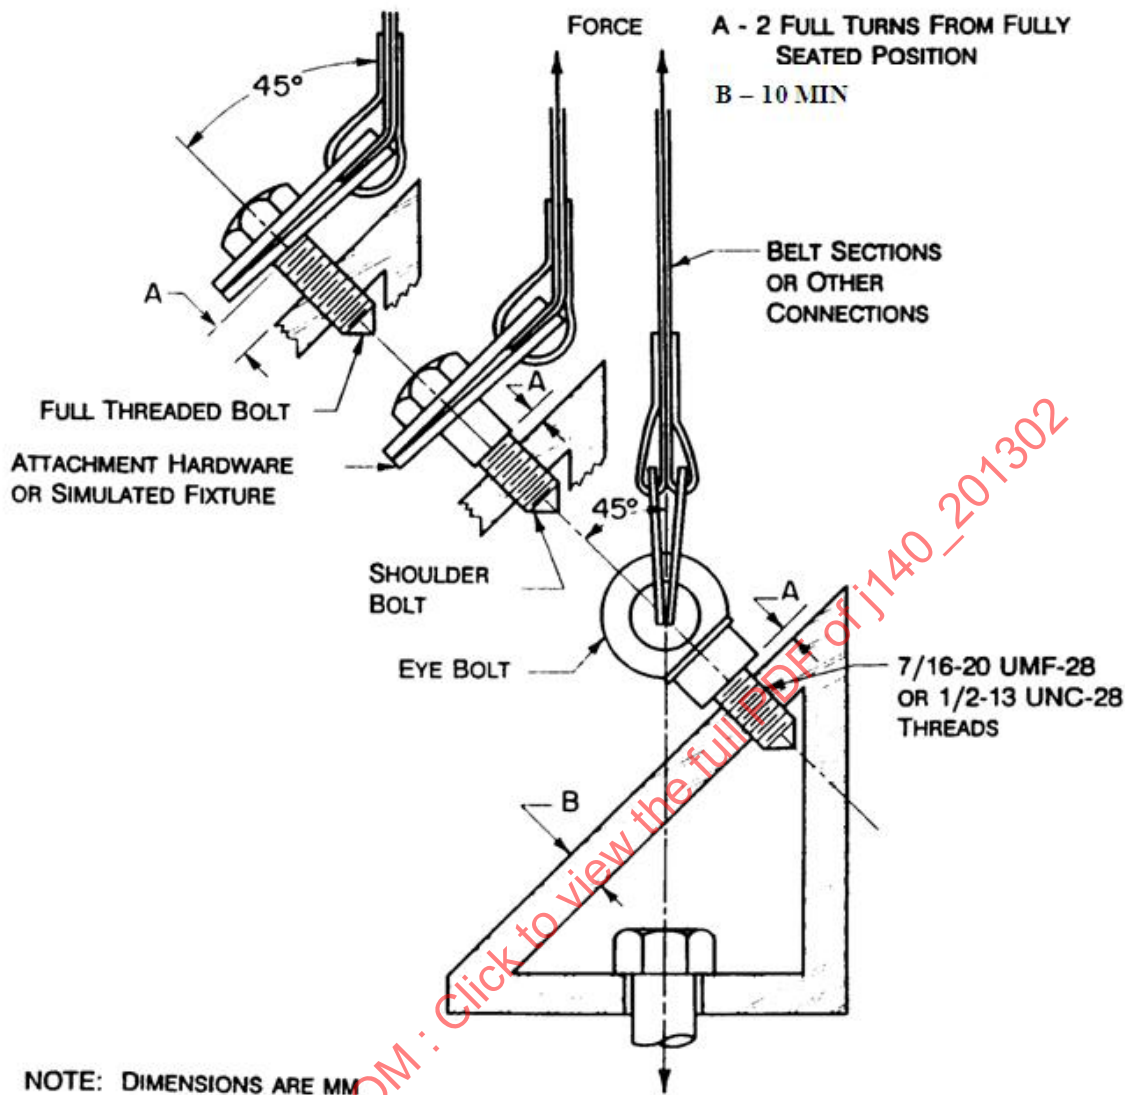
ATTACHMENT HARDWARE TEST FIXTURE
